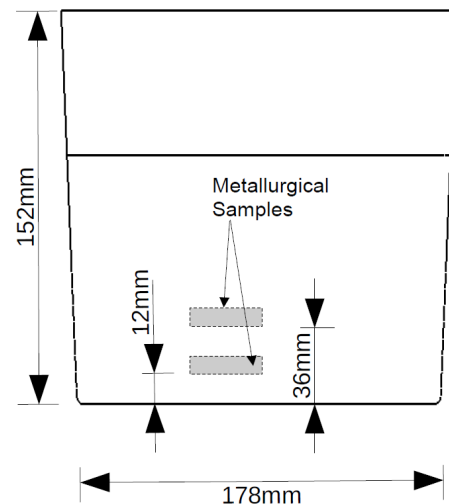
Schematic of Y-block casting and metallurgical sample location.
